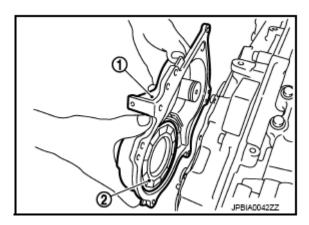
Identifying Valve Timing Control Cover And Magnet Retarder Courtesy of NISSAN NORTH AMERICA, INC.
